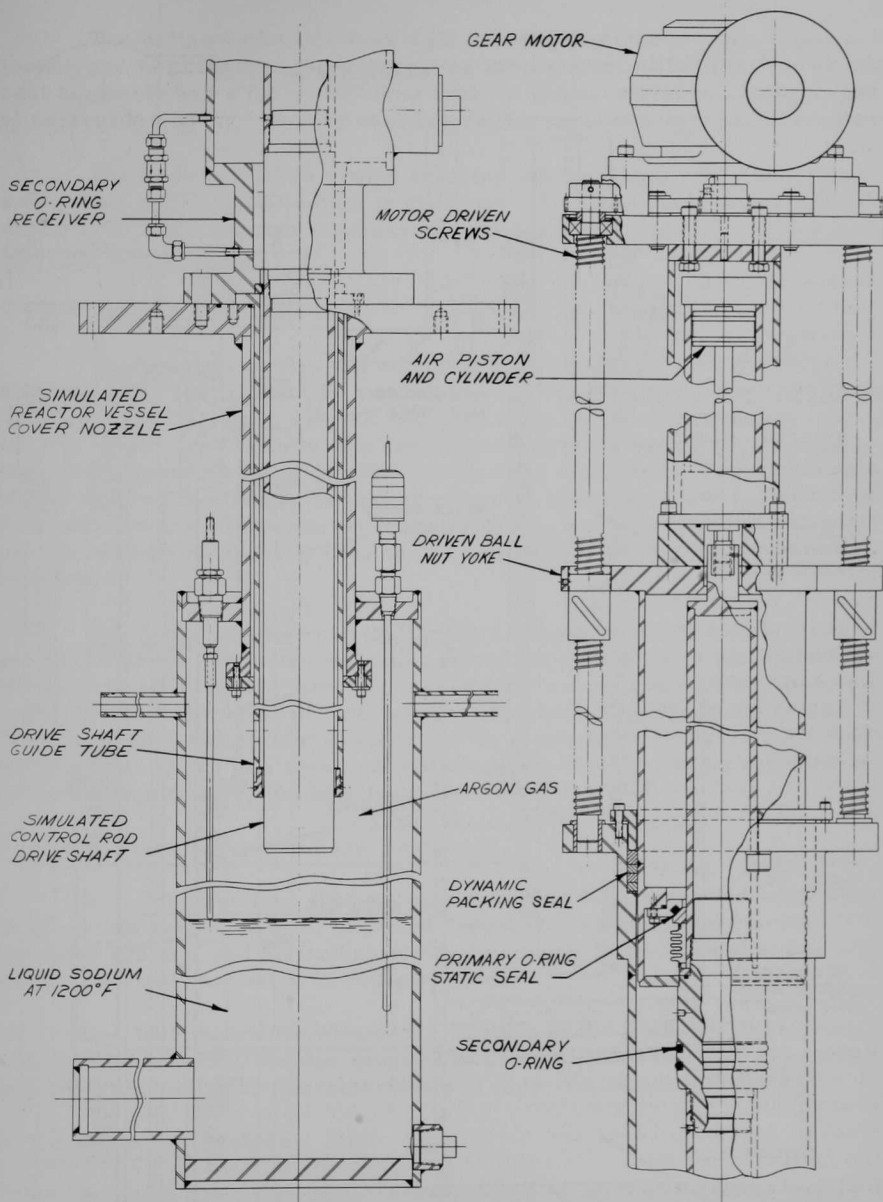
FARET Control Rod Drive Mechanism Sliding Seal Test Apparatus
